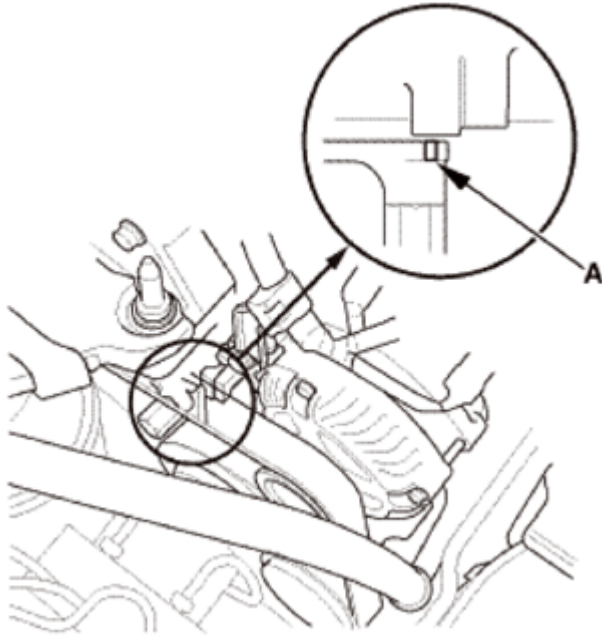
Identifying Auto-Tensioner Indicator Pointer
